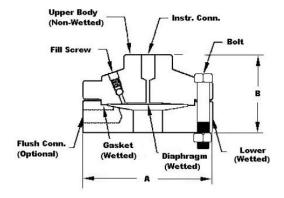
Seal Dimensions (Threaded Process Connection Seals)
